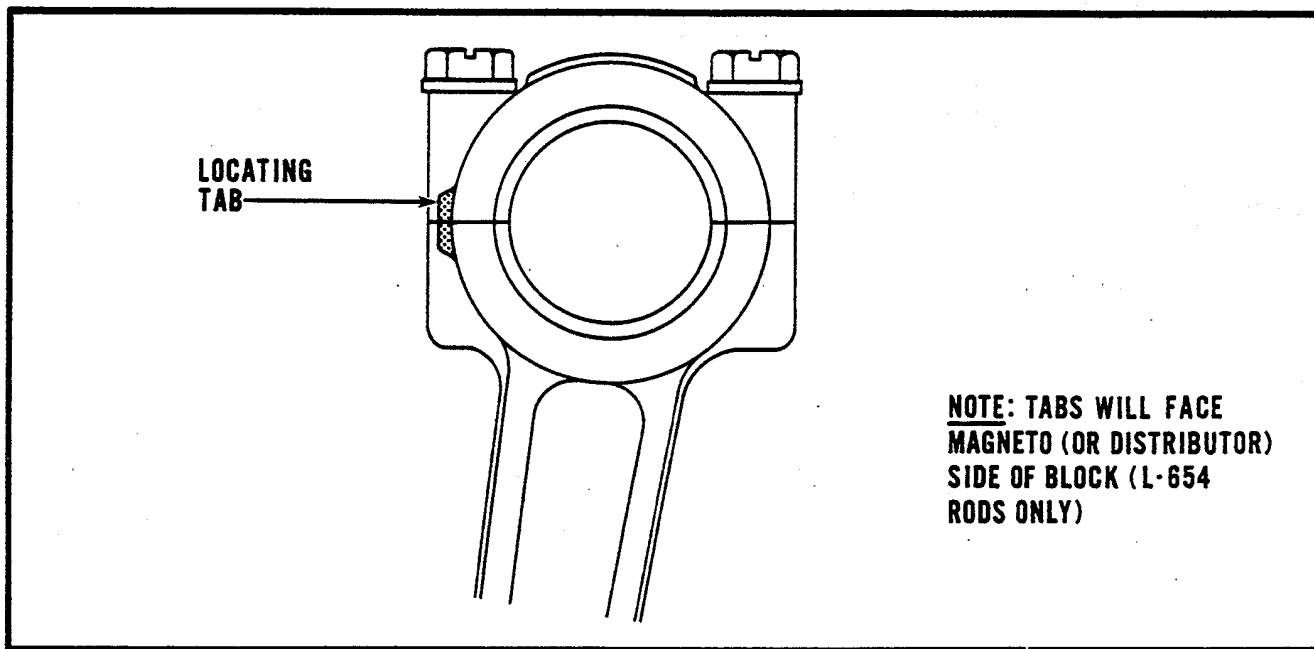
LOCATING TAB ON L654 CONNECTING RODS
